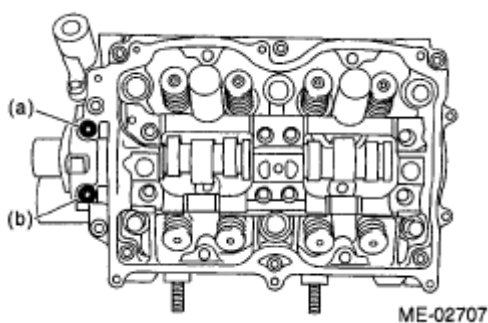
Removing Sequence Of Camshaft Cap Bolts
